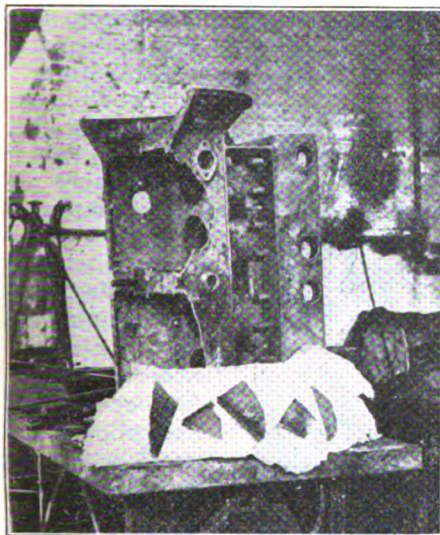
SHOWING THE LOCATION AND EXTENT OF THE FRACTURE
